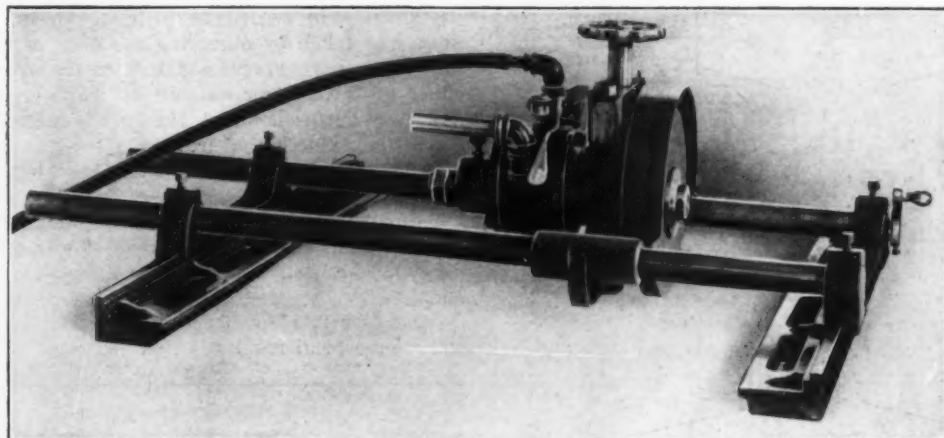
The Monarch Valve Seat Grinder Sold by the Quincy Enameling & Foundry Company, Quincy, Ill.
